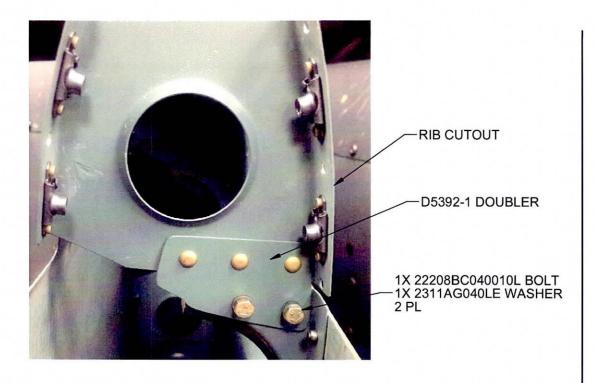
ANCHOR NUT INSTALLATION (LH SHOWN, RH OPPOSITE)
